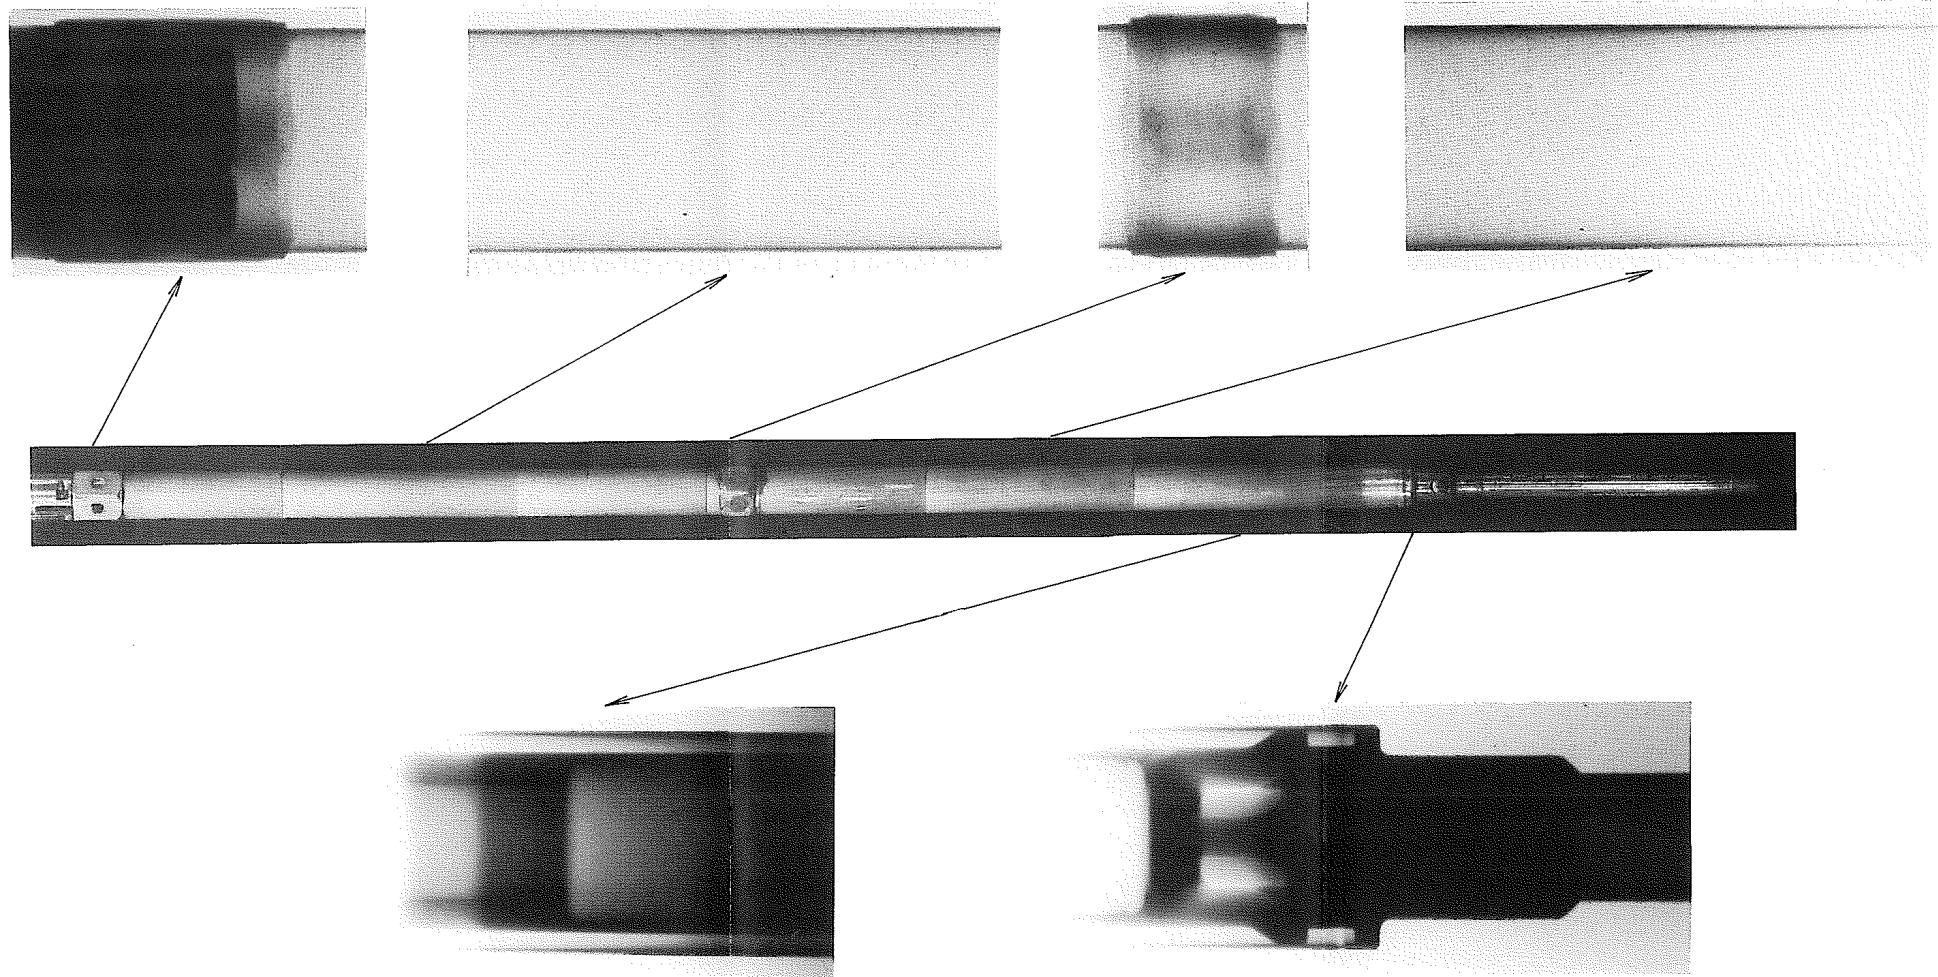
Surface View and x-ray Radiographs of the Lower Guide
